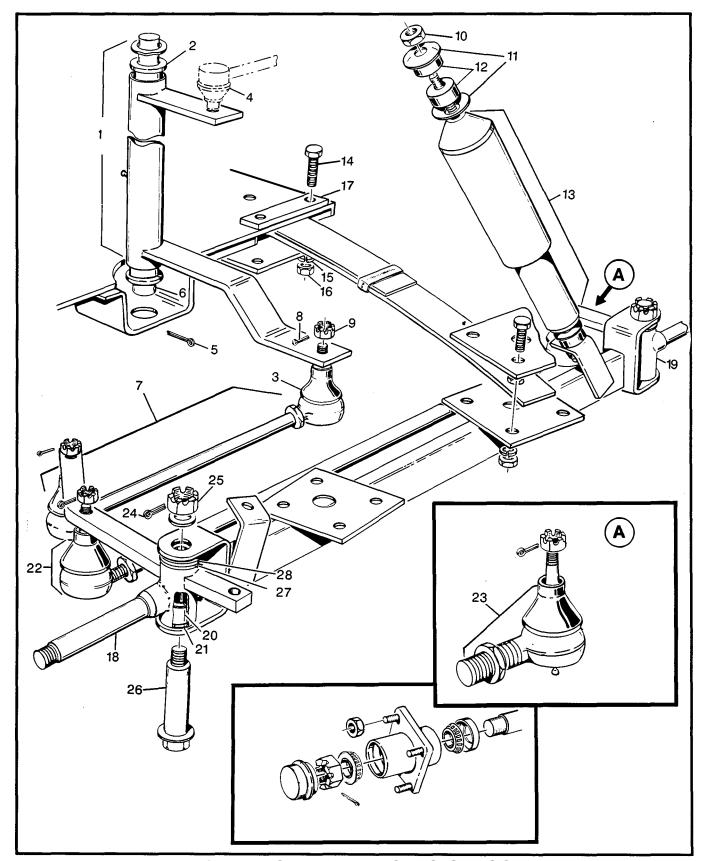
FOUR WHEEL FRONT SUSPENSION
